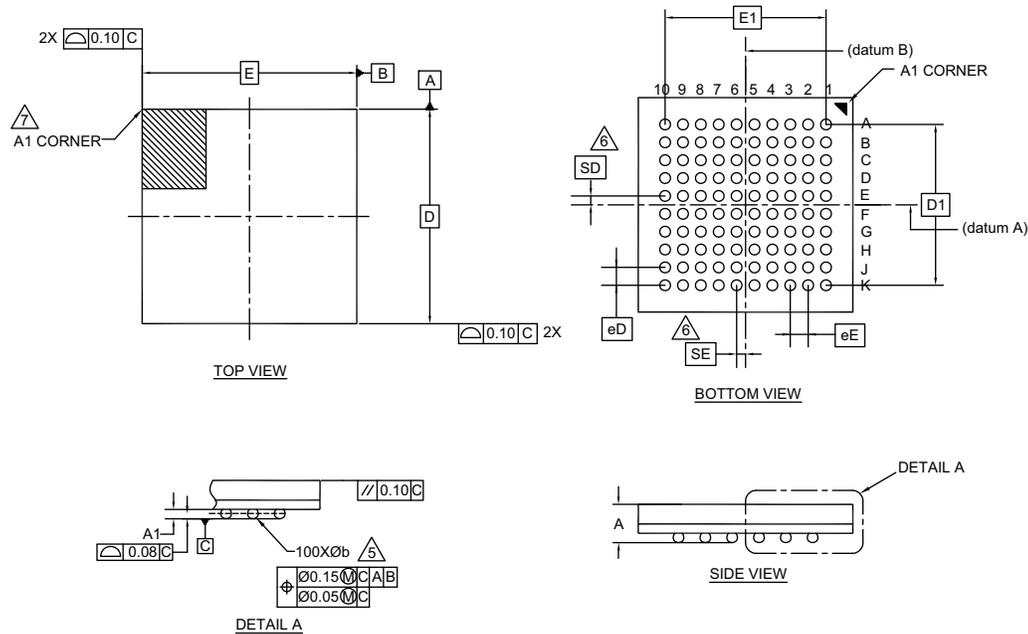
100-Ball BGA (6.0 × 6.0 × 1.0 mm) BZ100 Package Outline
